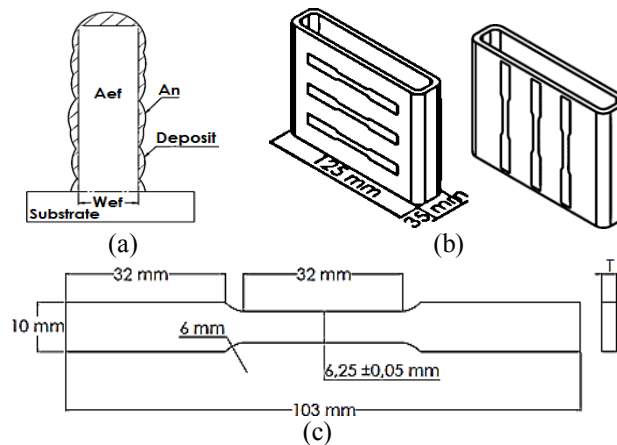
(a) Illustration of measurements in transversal section of the boxes; (b) Longitudinal and transversal tensile test samples; (c) Drawing of the tension specimens.
